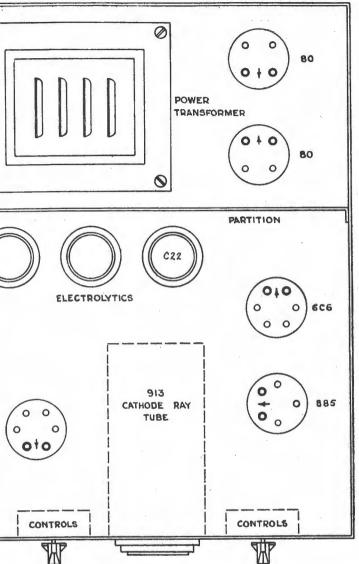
Suggested chassis layout for the 913 oscillograph. The drawing is made to $\frac{1}{2}$ in. \pm 1in. scale.
